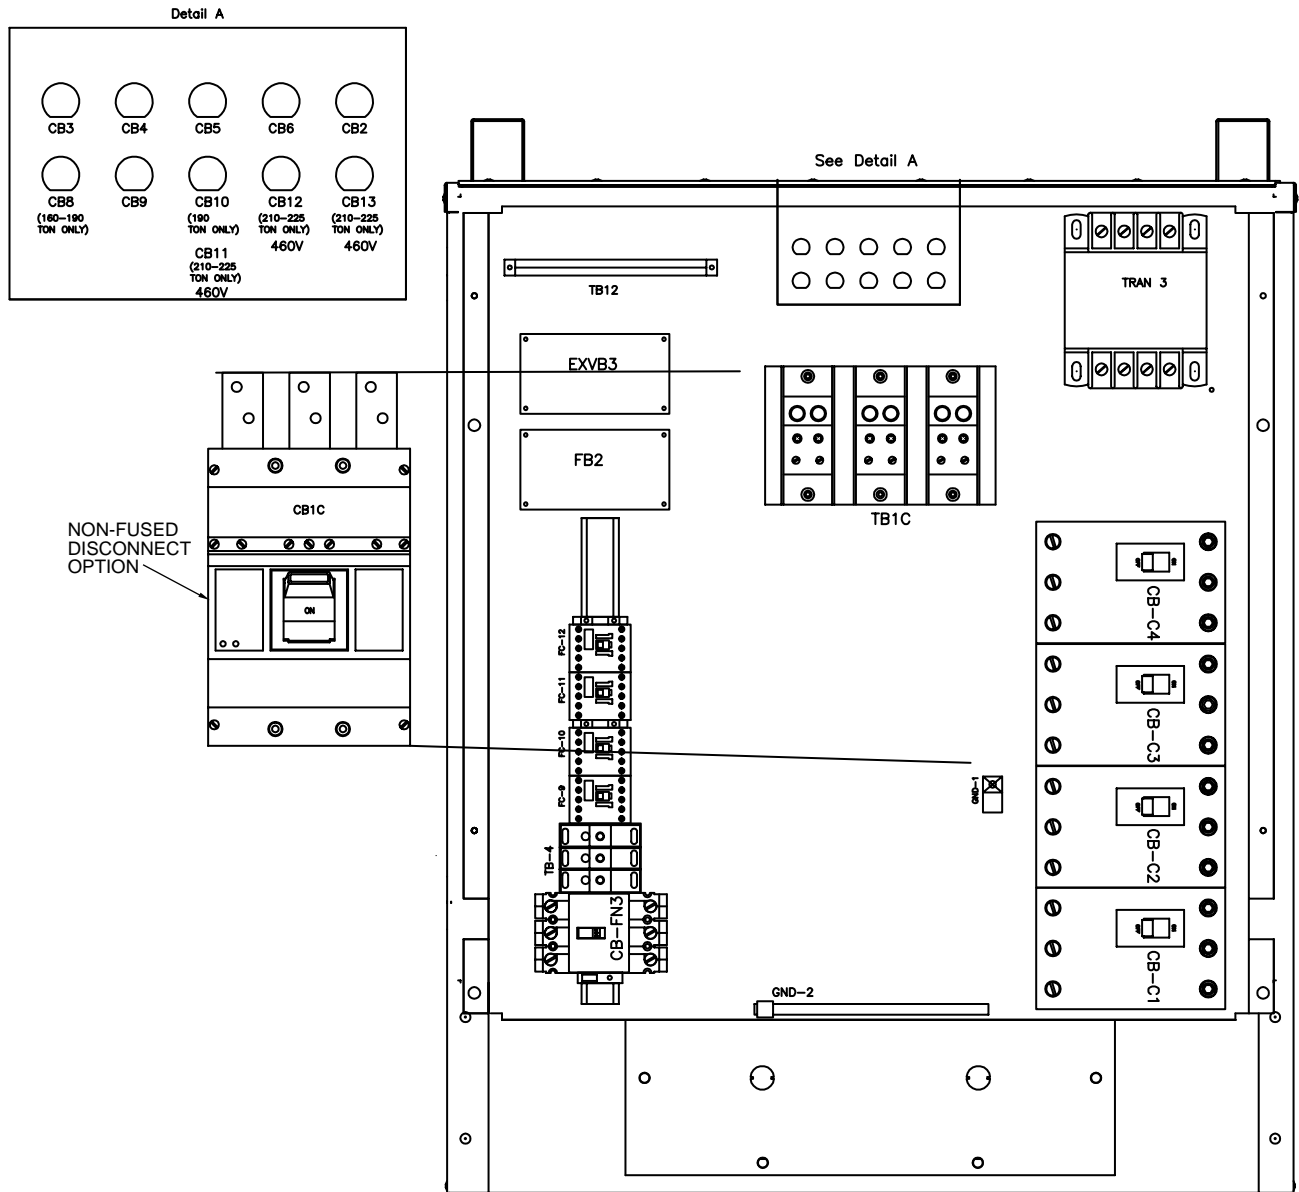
Component Arrangement, 30RB130-190,380, 460/575 V and 30RB210,225, 460/575 V
